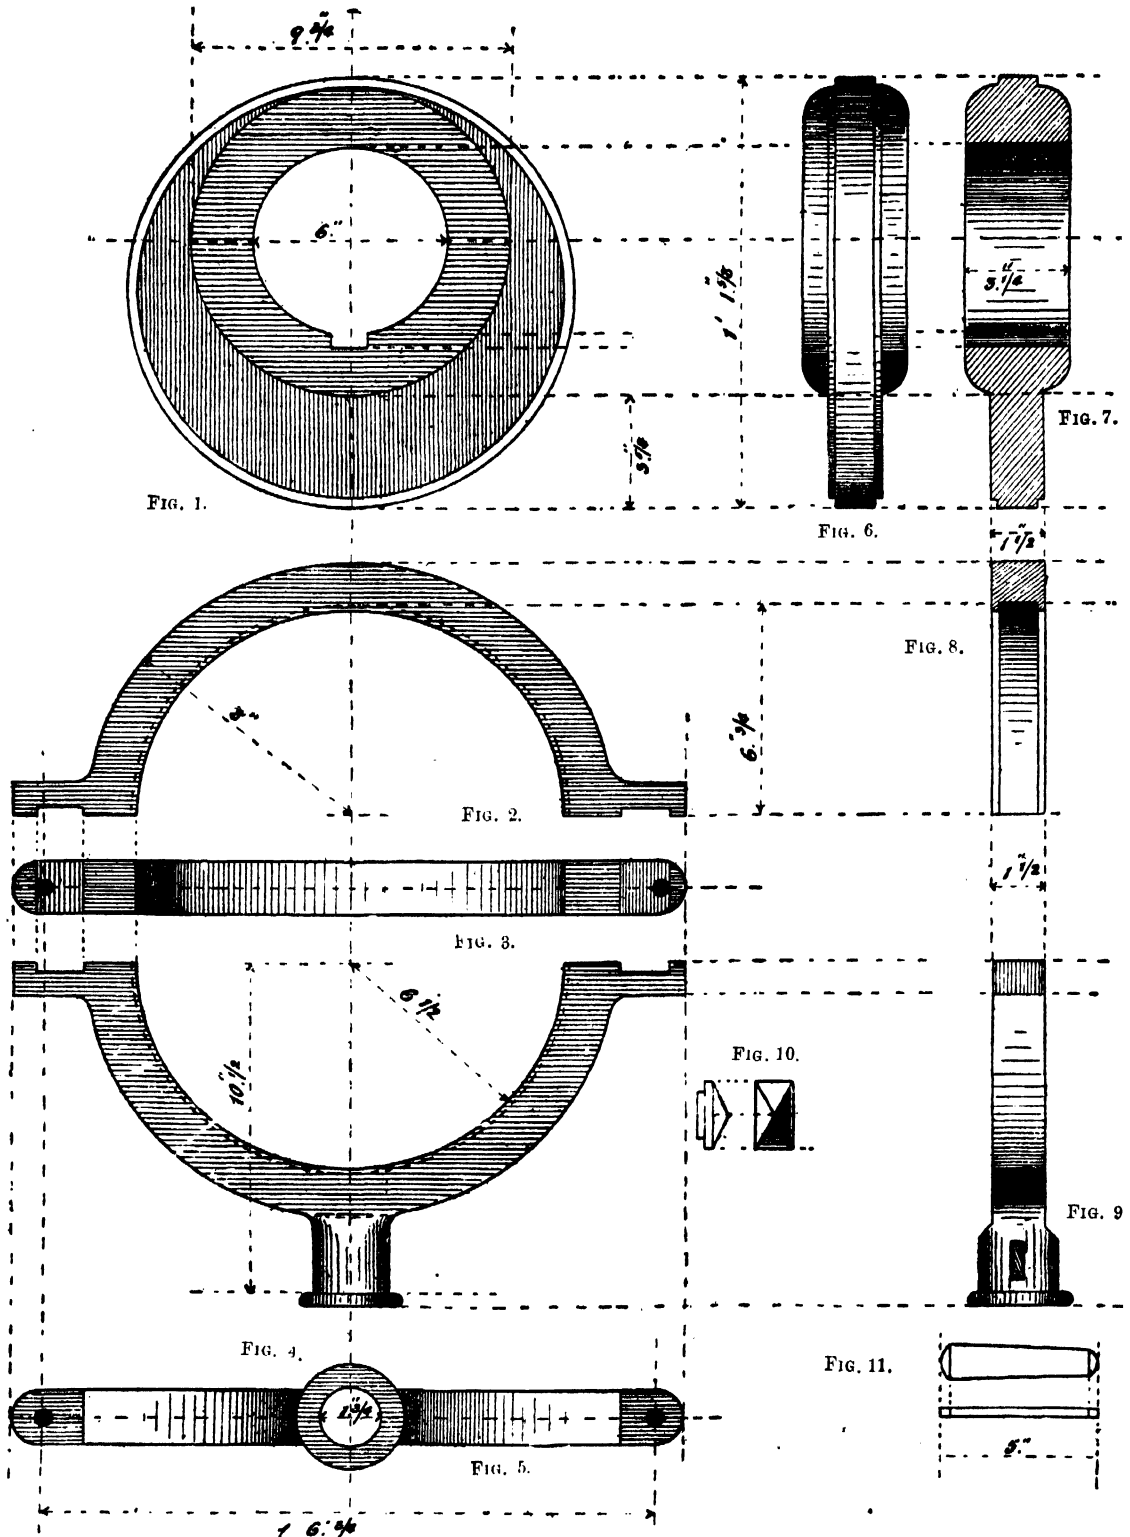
ELEVATION OF ECCENTRIC.—FIG. 2. ELEVATION OF RIGHT-HAND STRAP OF ECCENTRIC.—FIG. 3. INSIDE PLAN OF STRAP.—FIG. 4. ELEVATION OF LEFT-HAND ECCENTRIC STRAP.—FIG. 5. PLAN LOOKING UP OF STRAP.—FIG. 6. END OR EDGE VIEW OF ECCENTRIC.—FIG. 7. SECTION OF ECCENTRIC.—FIG. 8. EDGE VIEW OF RIGHT-HAND STRAP.—FIG. 9. EDGE VIEW OF LEFT-HAND STRAP.—FIG. 10. OIL CAP.—FIG. 11. KEY OR COTLAR.
